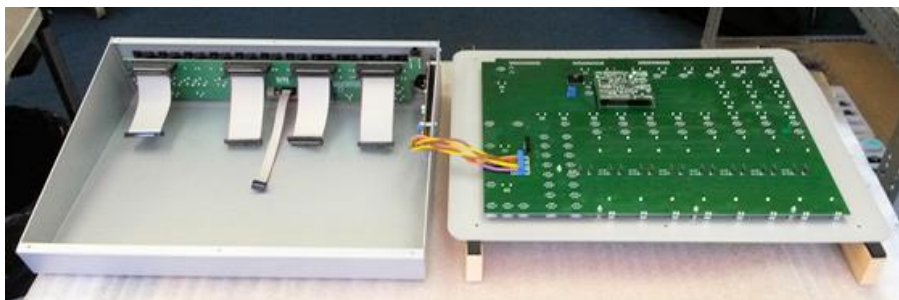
Airlite disassembled for placing the optional AES output board and or USB board
